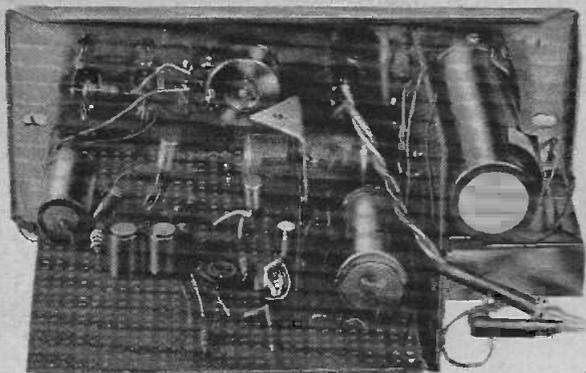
Layout and wiring of the complete amplifier. Shown for clarity, with boards removed.
